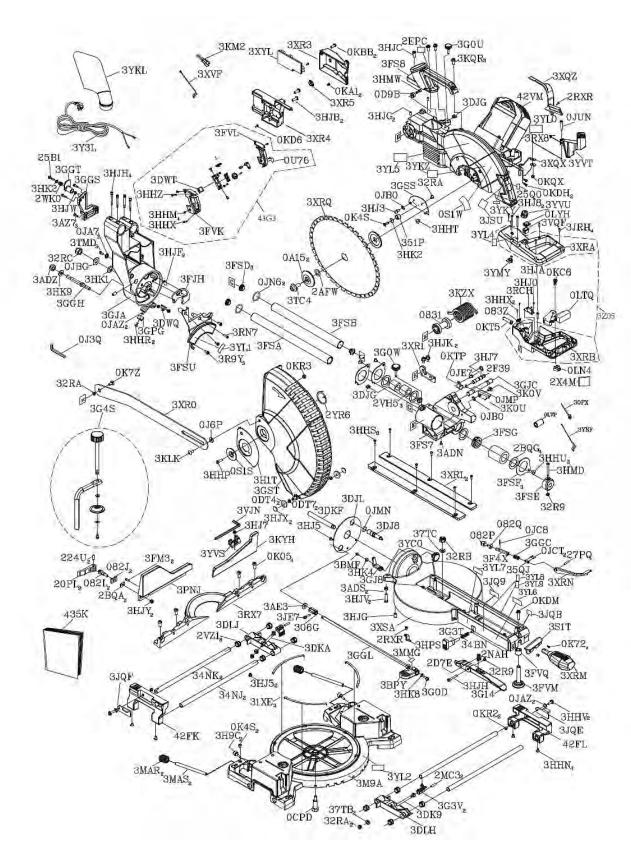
Spare parts drawing 1 KGZ 3050 VARIO
